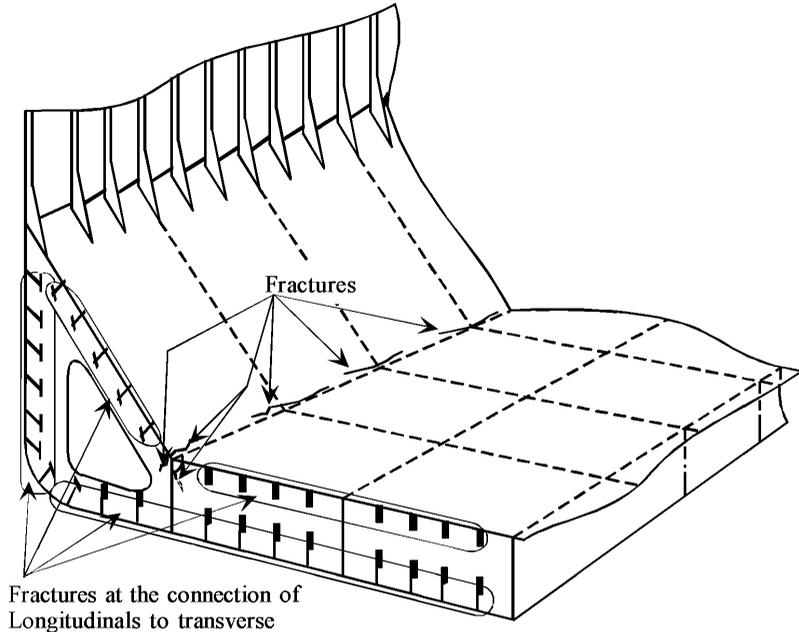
Typical fractures in the connection of hopper sloping plating to inner bottom (tank top) and longitudinals to transverse (or transverse bulkhead)
